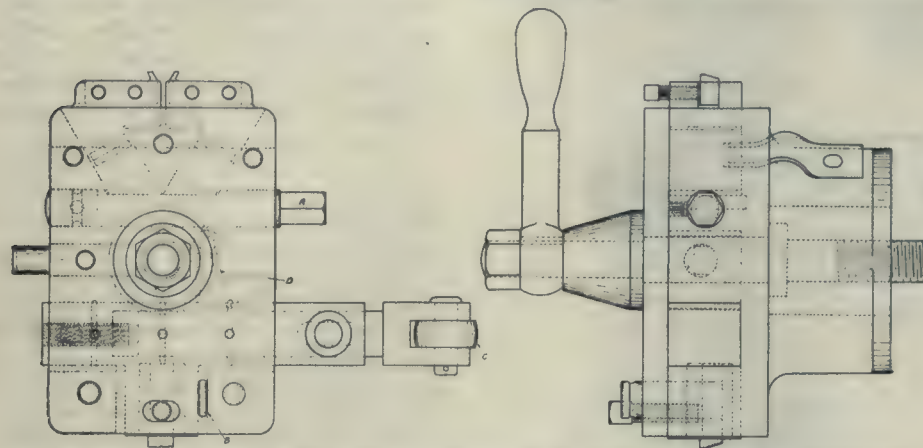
TOOL HOLDER FOR TOOLS FORMING WAVED LINES AND UNDERCUTTING.
